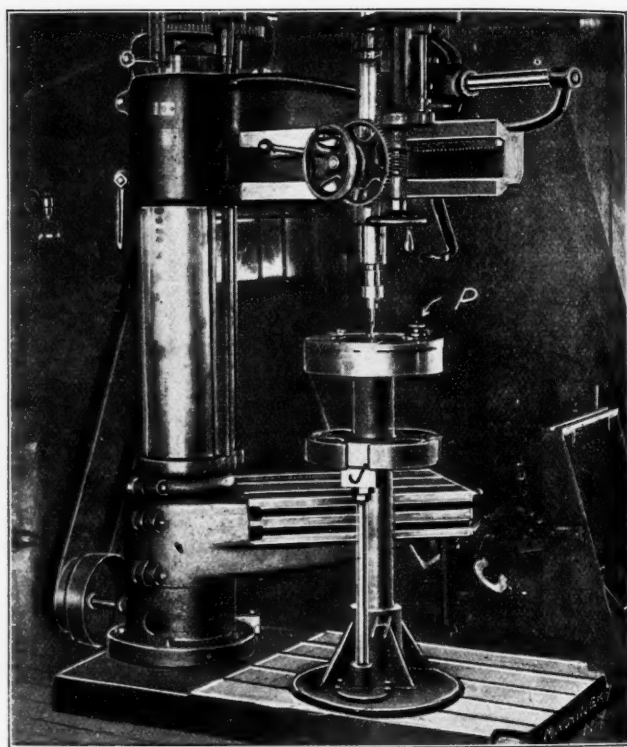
Drilling the Dowel and Screw Holes for the Rotating Lugs.
